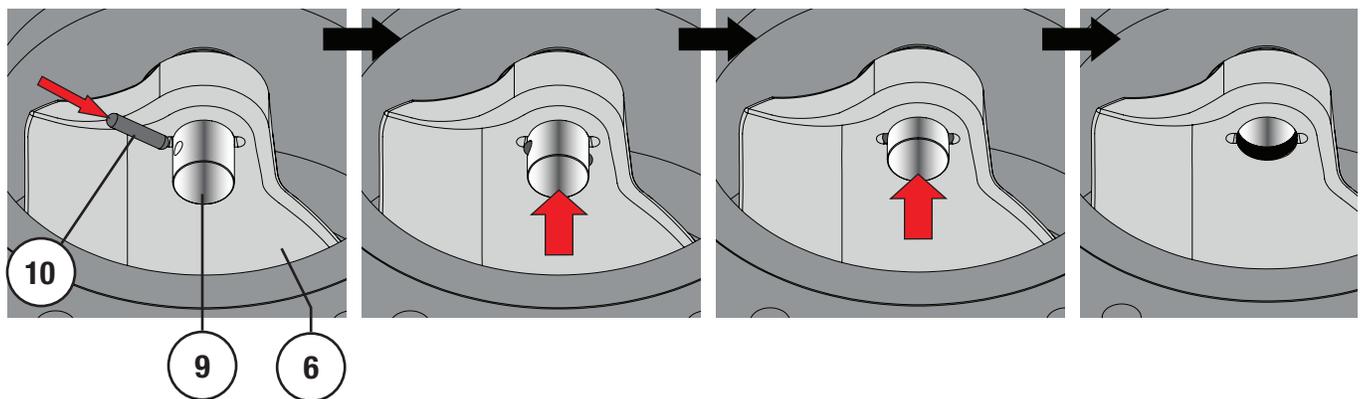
16 to 24" NPS Drive Shaft / Ball Installation (Step 2)
